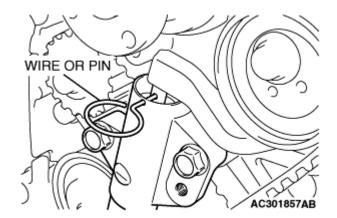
Tightening Timing Belt Tensioner Pulley Mounting Bolt
